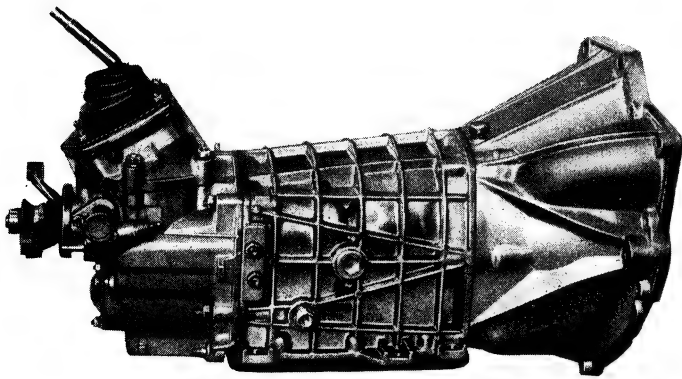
Right hand side view of 1500 Cabriolet transmission assembly.
